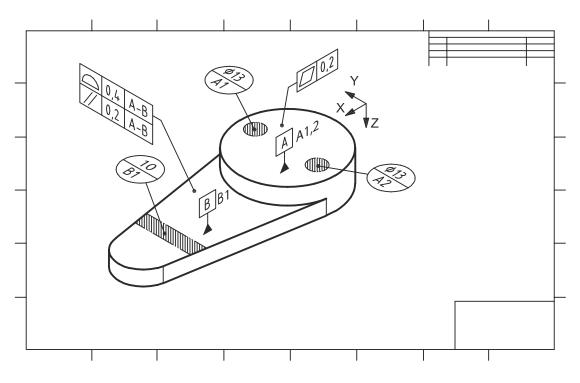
Datum targets and indicators in an axonometric view
